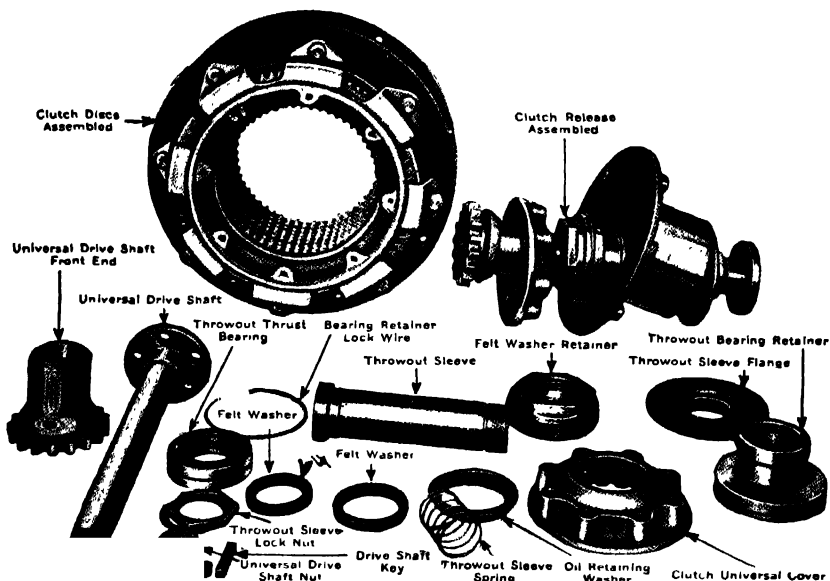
Clutch-release Mechanism. (Marmon)
